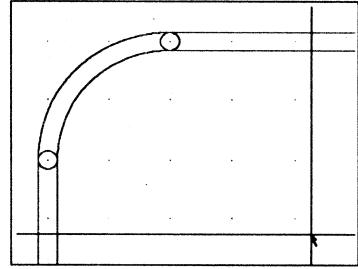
Enlarged view of corner after deleting 90° segments.
